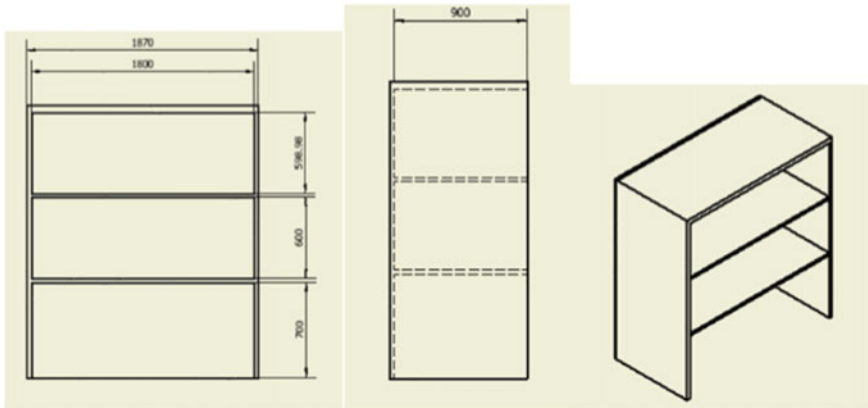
The size of a more common luggage rack in the boarding area of a passenger carriage
